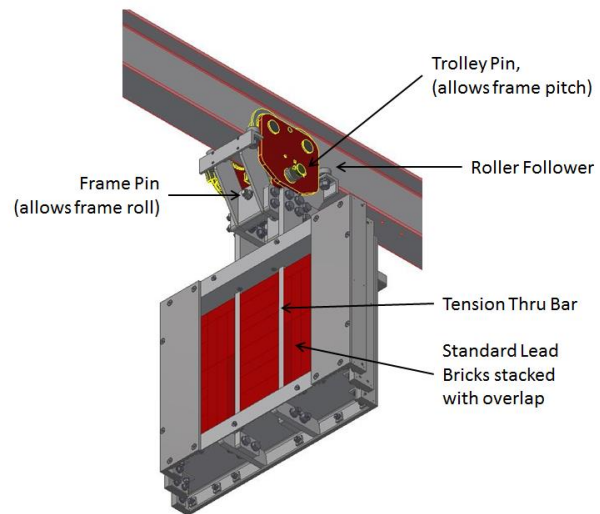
Upstream I-Beam installation allows travel of Side Shield Compartment Frame
